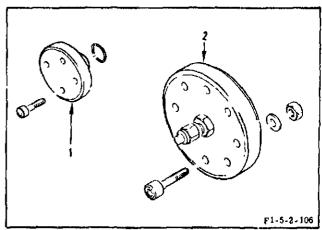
Pressure Test Fixture T-5041516 (Sheet 1 of 2)
